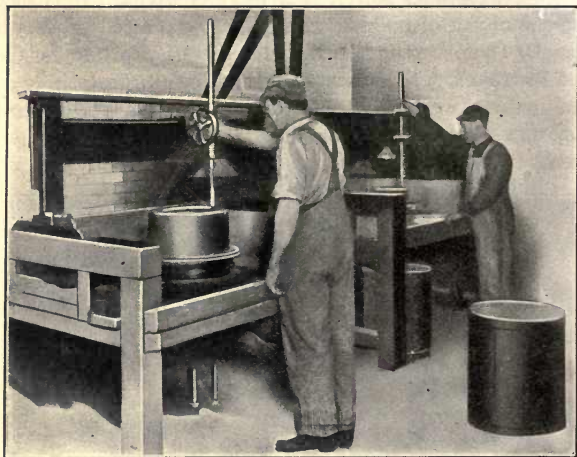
Shaving grinding wheels preparatory to vitrifying.
